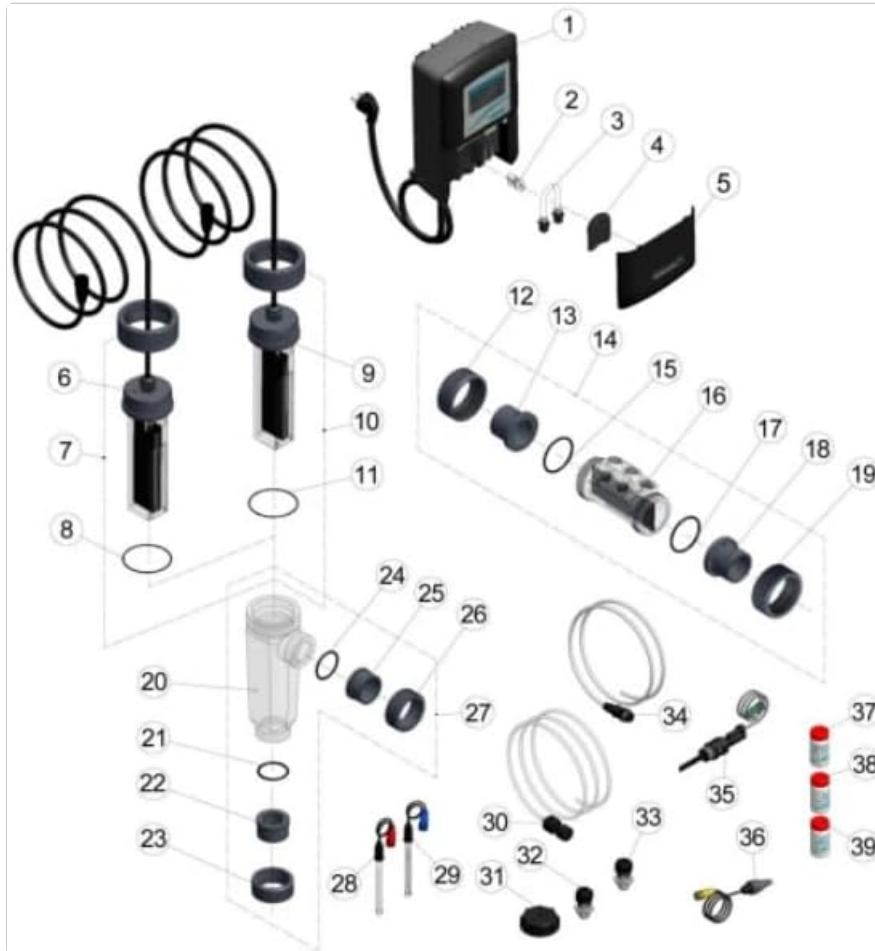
Exploded view of the Bayrol Automatic Salt Electrolyzer system components.
